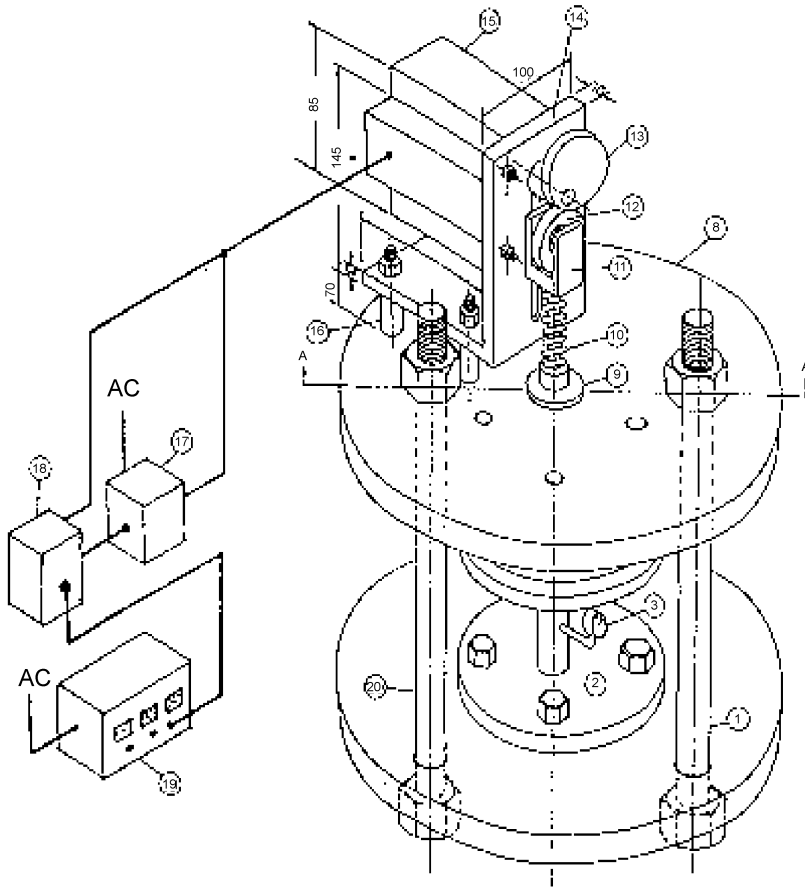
Isometric view of Cyclic hydrostatic stress-generating machine. 1. High-tensile bolts, 2. Sample tube, 3. Pressure gauge, (4, 5, 6, 7: Cell sample, Piston, Air cylinder and O-rings shown in Fig. 2), 8. Upper plate, 9. Brass bush, 10. Spring, 11. Forked key, 12. Roller bearing, 13. Cam, 14. Angle plate, 15. Stepper motor, 16. Spacers, 17. Controller card, 18. Driver card, and 19. Power supply.
